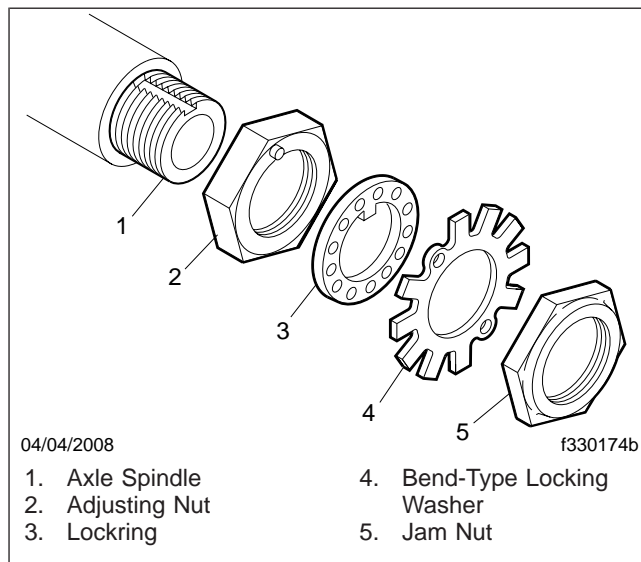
, Typical Four-Piece Wheel Bearing Lock Set
